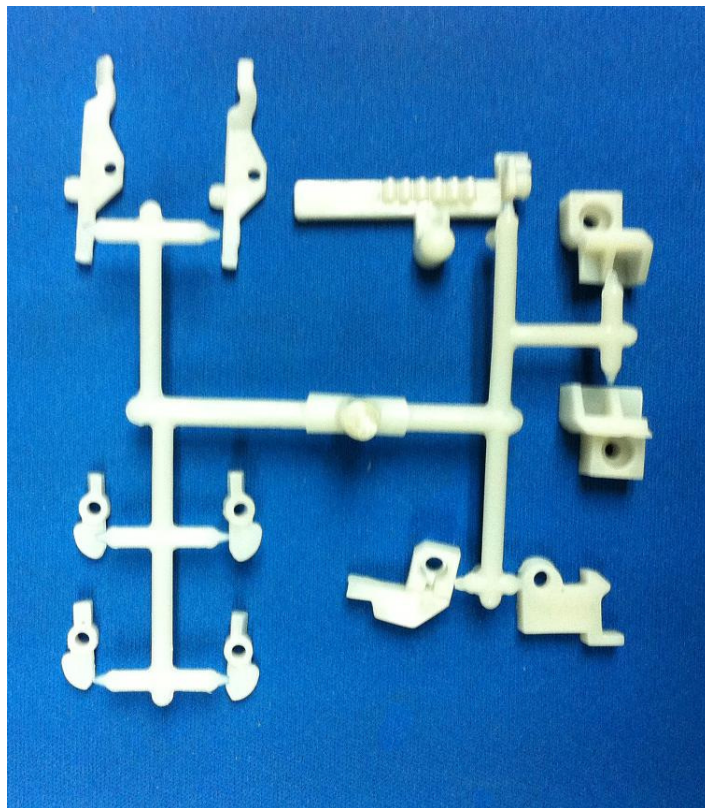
A photo of a test shot produced by a “Family Mould” (*Courtesy: the supporting company*)
